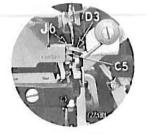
Right Looper, Three-Thread Machines 246K43 and 246K45
